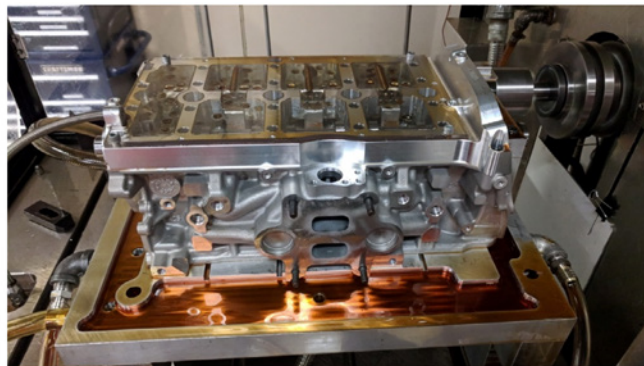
Complete DSF cylinder head assembly on test stand
